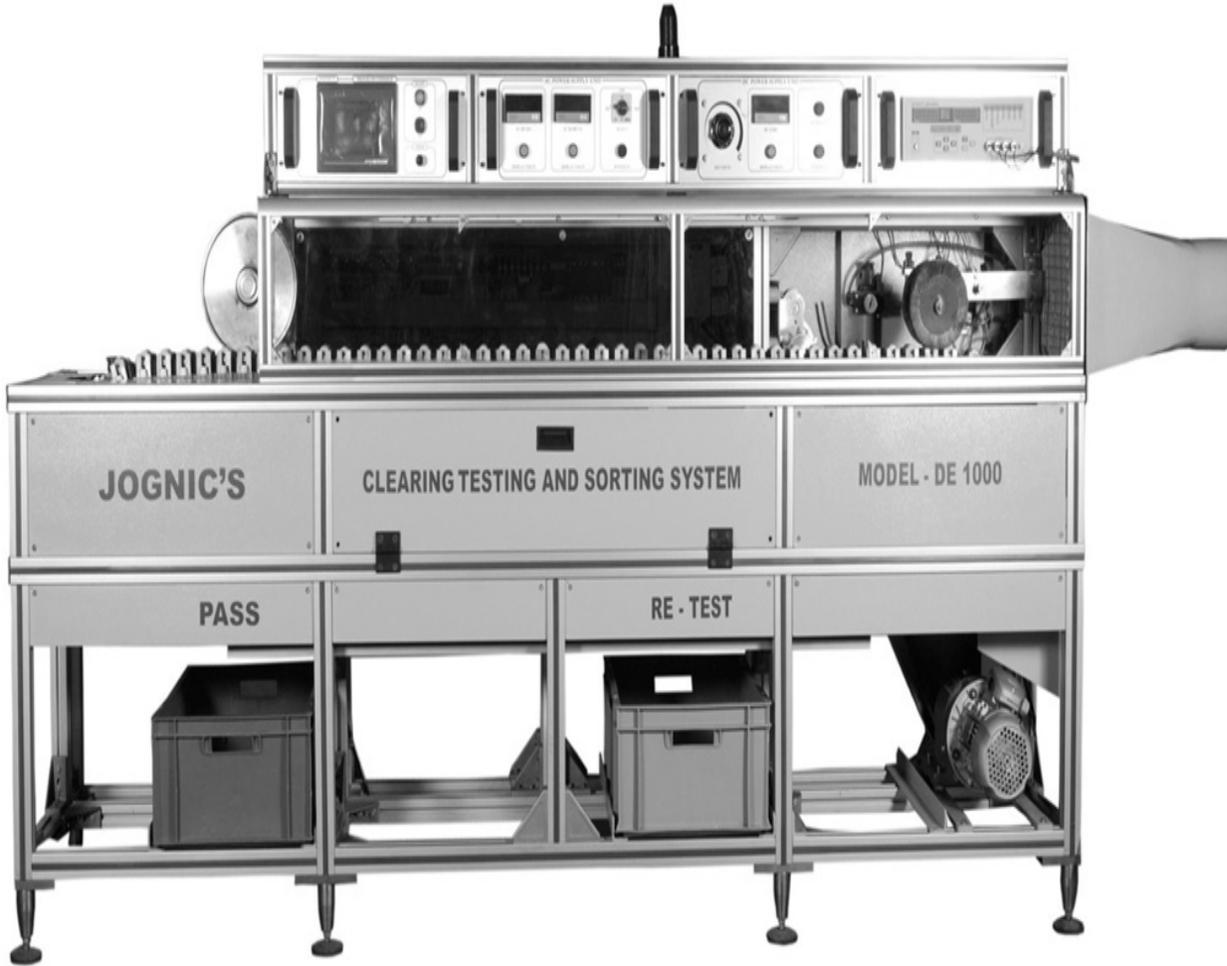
Automatic short clearing and test equipment for elements.
